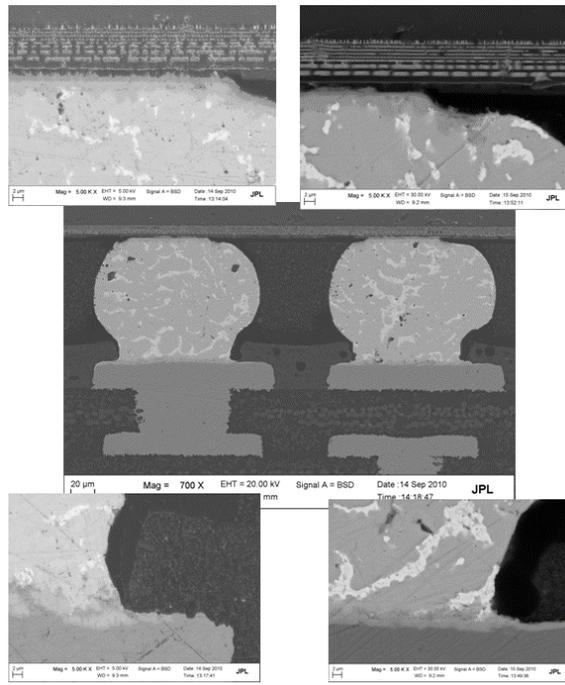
Cross-sectional photomicrographs of FCBGA1704 assembly after thermal cycling showing detailed metallurgical features of flip-chip solder balls at the die level.
